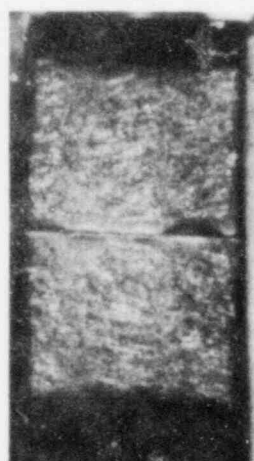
Charpy Impact Specimen Fracture Surfaces for H.B. Robinson Unit 2
